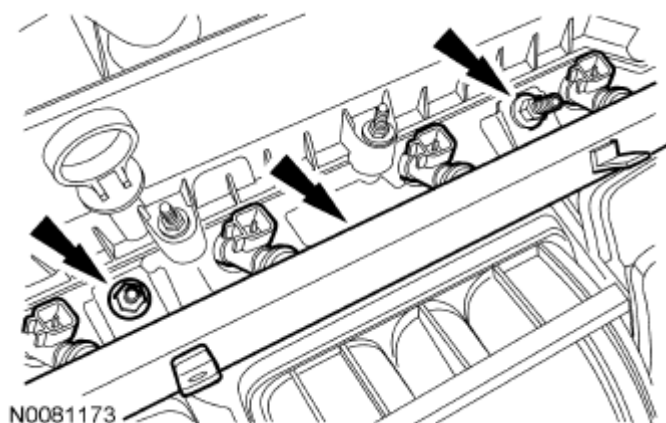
Locating Stud Bolts, Fuel Rail & Fuel Injectors
